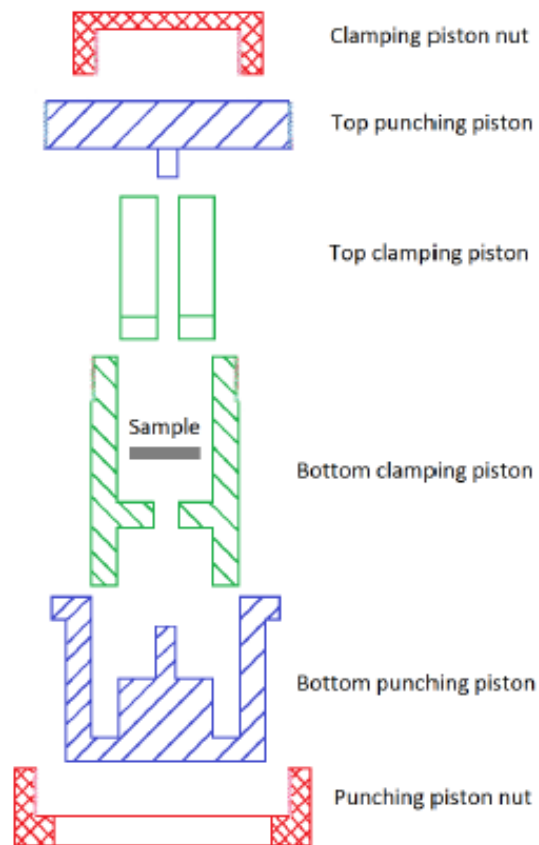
Technical drawing of the Shale puncher design. (Stenebråten, et al. 2008)
